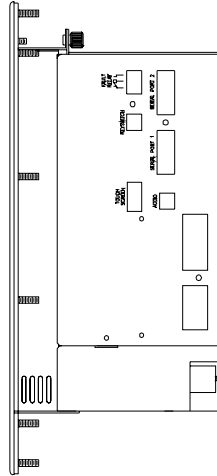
PanelMate 5000 Touchscreen Unit Side View
